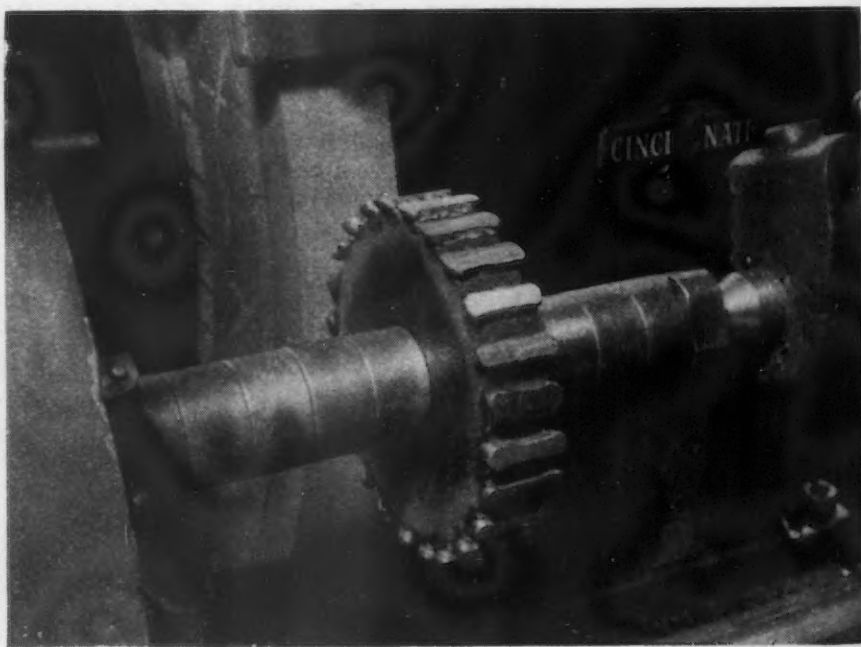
Cylindrical grinding of the o.d. of a milling cutter having the teeth built up by welding.
